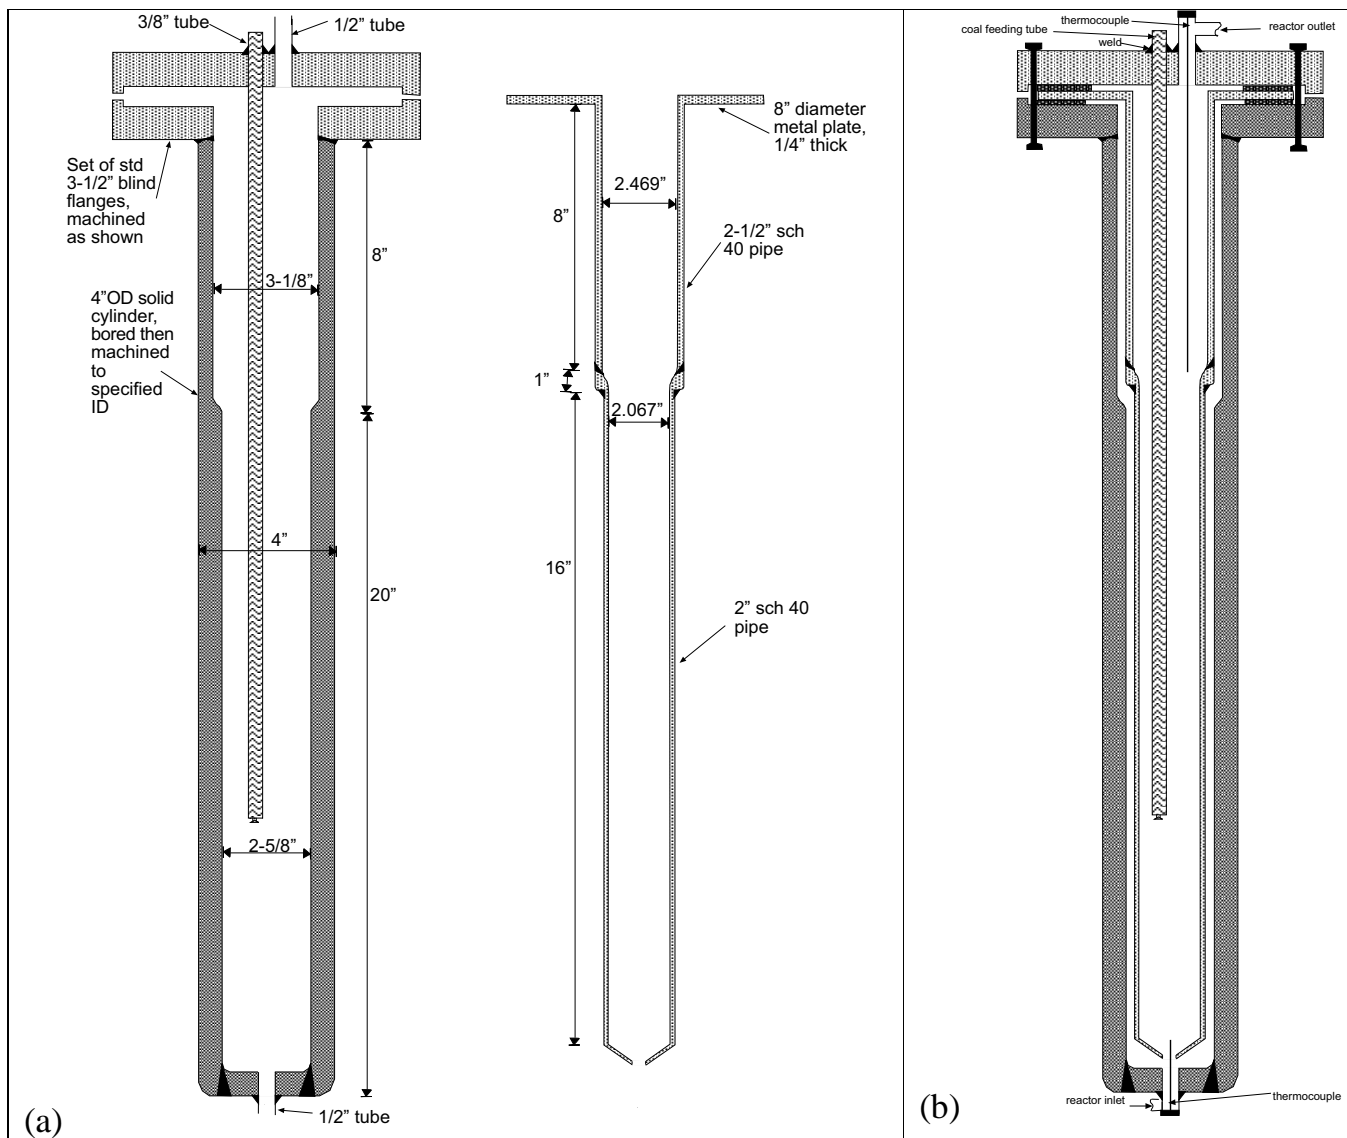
Reactor enclosure and insert assembly. The two separate pieces are shown in (a), while (b) shows how the insert fits inside the enclosure.
